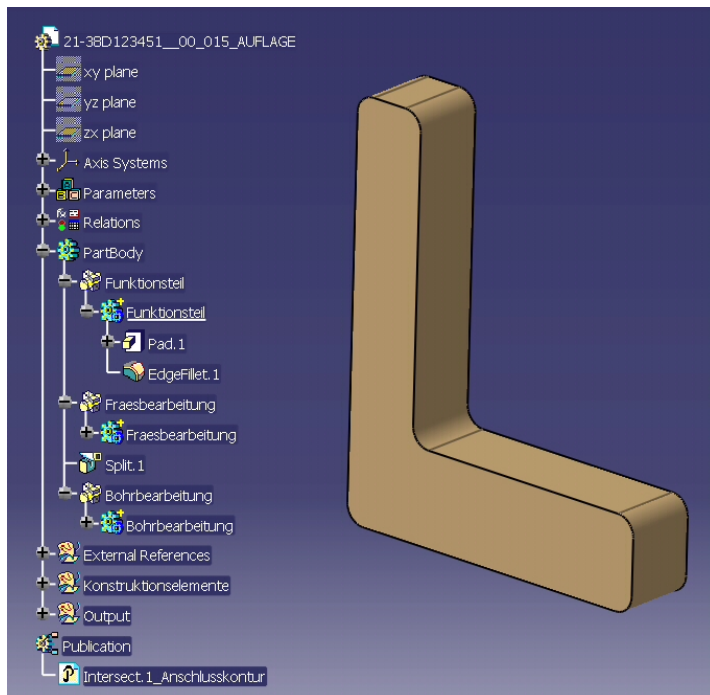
Body function part contains unprocessed blank part (here: flame-cutting template)
